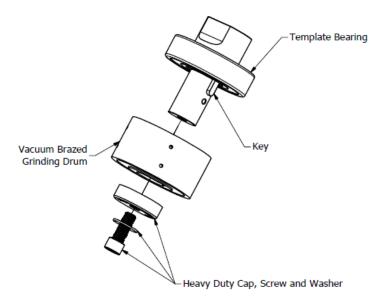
3" Rapid Z[™]-DRUM with Template Bearing (Exploded)
